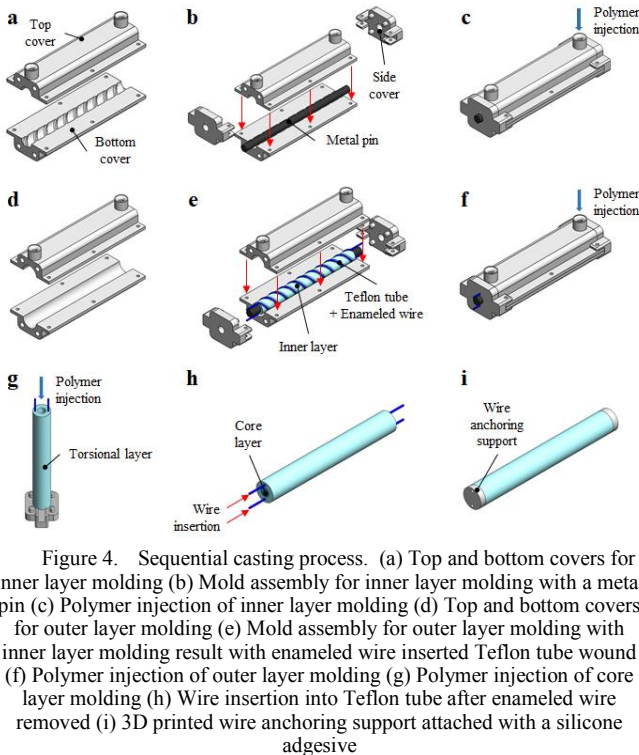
Sequential casting process. (a) Top and bottom covers for inner layer molding (b) Mold assembly for inner layer molding with a metal pin (c) Polymer injection of inner layer molding (d) Top and bottom covers for outer layer molding (e) Mold assembly for outer layer molding with inner layer molding result with enameled wire inserted Teflon tube wound (f) Polymer injection of outer layer molding (g) Polymer injection of core layer molding (h) Wire insertion into Teflon tube after enameled wire removed (i) 3D printed wire anchoring support attached with a silicone adhesive
